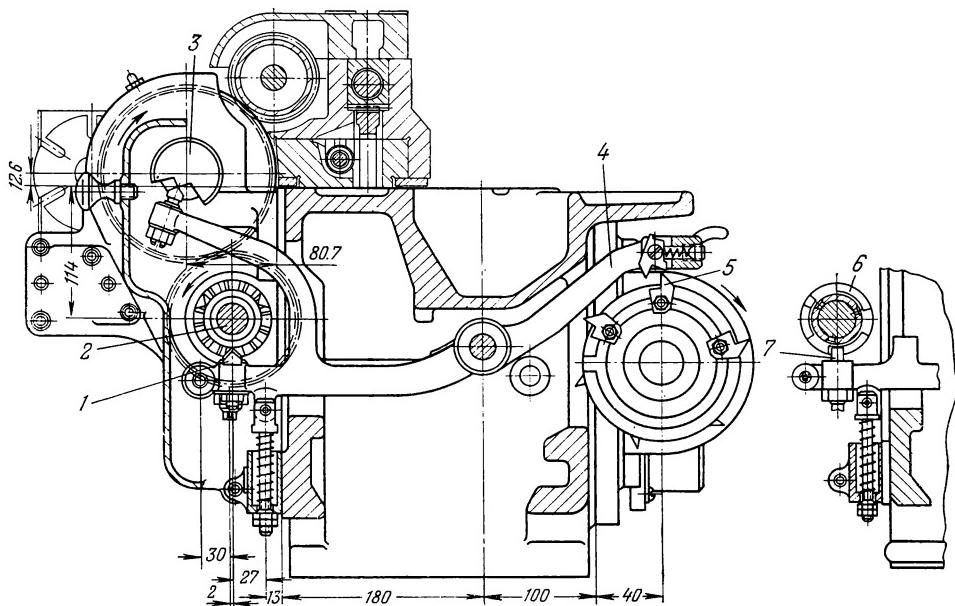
Mechanism for engaging the single-revolution clutch for indexing the turret in automatic screw machines, models 1A136 and 1E136
